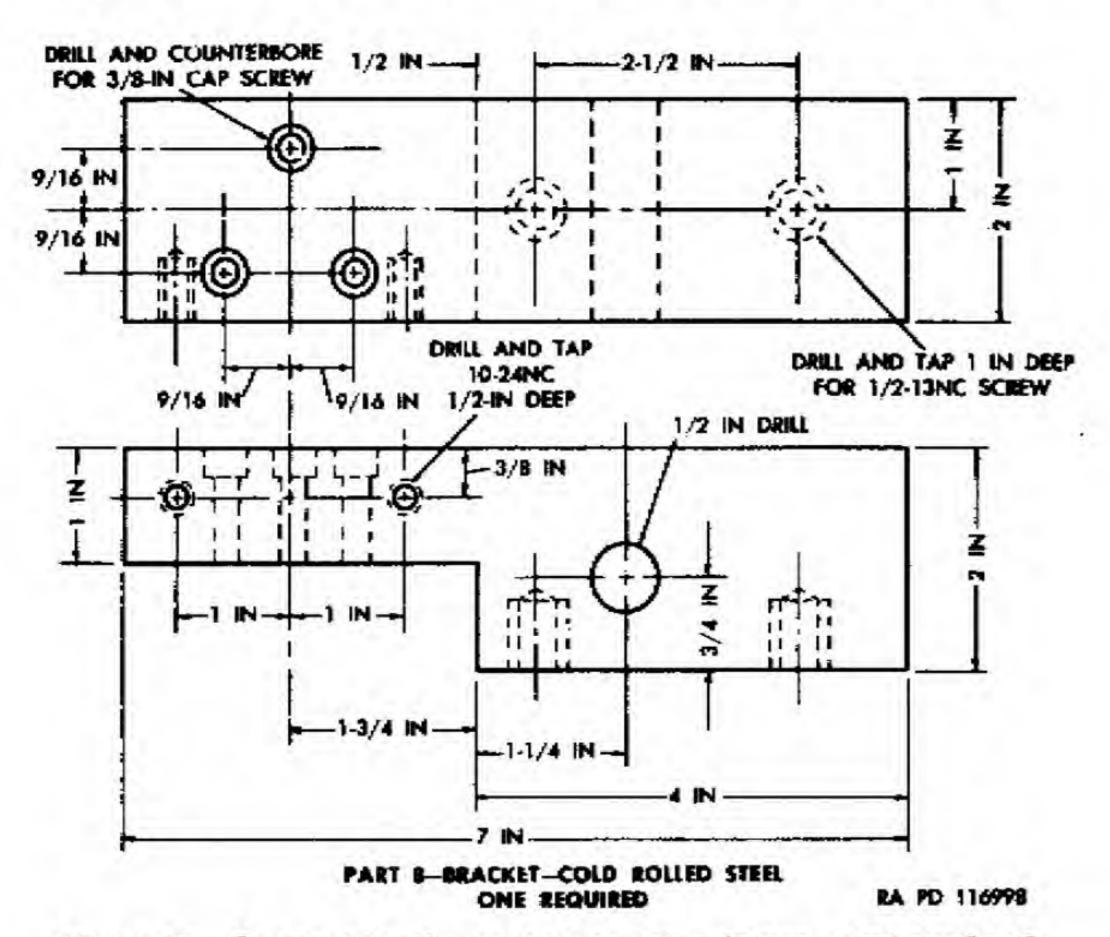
Detail of bench-mounted stamping fixture—part number 8.
